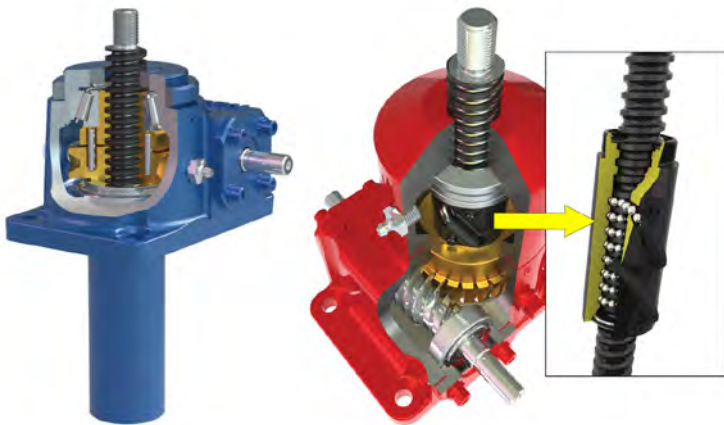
Machine screw jacks (left) use a threaded metal shaft and nut, which is very economical but provides high friction and low efficiency. Ball screw jacks (right) are more expensive, but their use of rolling balls reduces friction and improves efficiency. (Images courtesy of Thomson Industries.)
